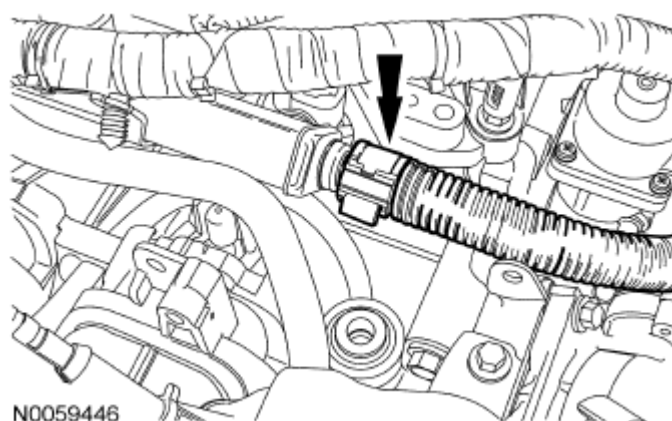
Locating Fuel Supply Tube Quick Connect Coupling
